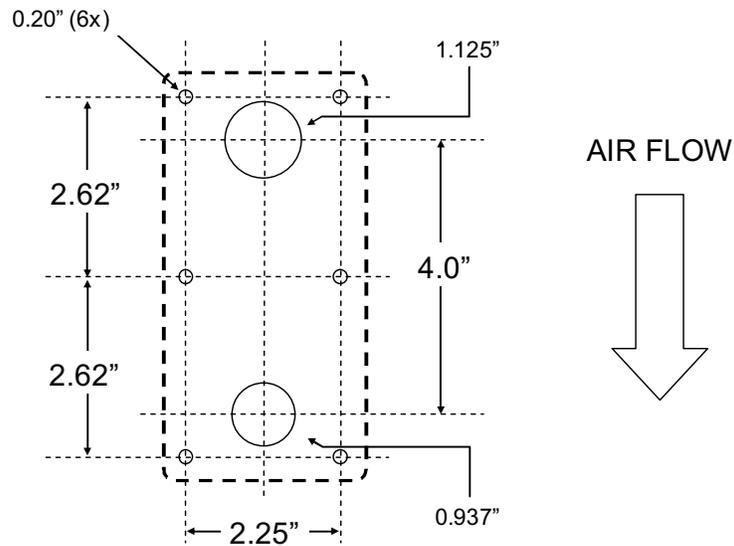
Sample Draw Duct Assembly Hole Mounting Pattern
